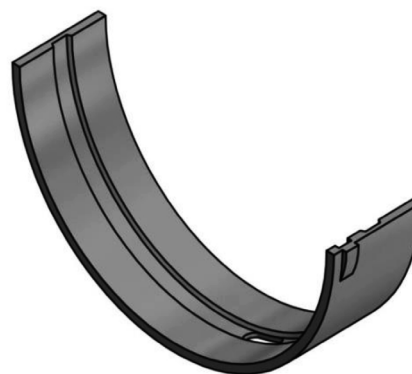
Axonometric view of half-shell bearing with oil groove of bearing used in calculations
